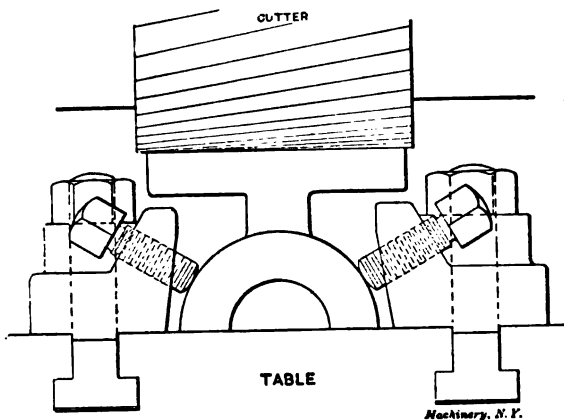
Simple Holding Device used when Slab Milling the Lower Surface of the Base.
